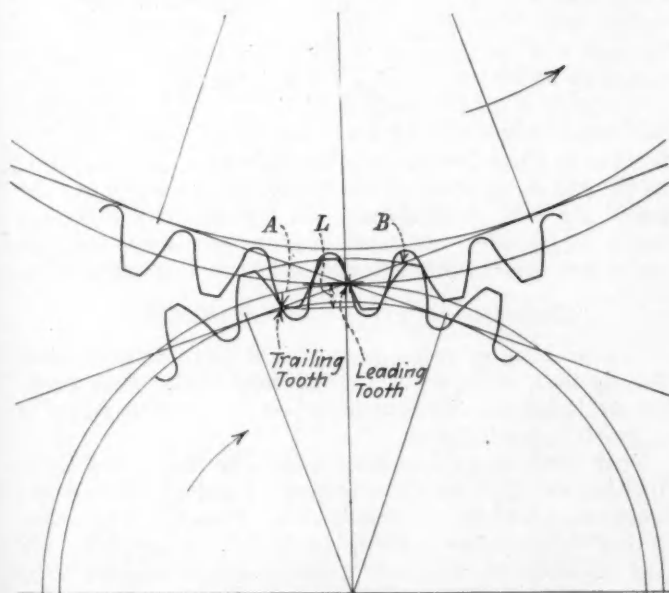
CONTACT BETWEEN GEARS WITH TEETH OF STANDARD FORM
